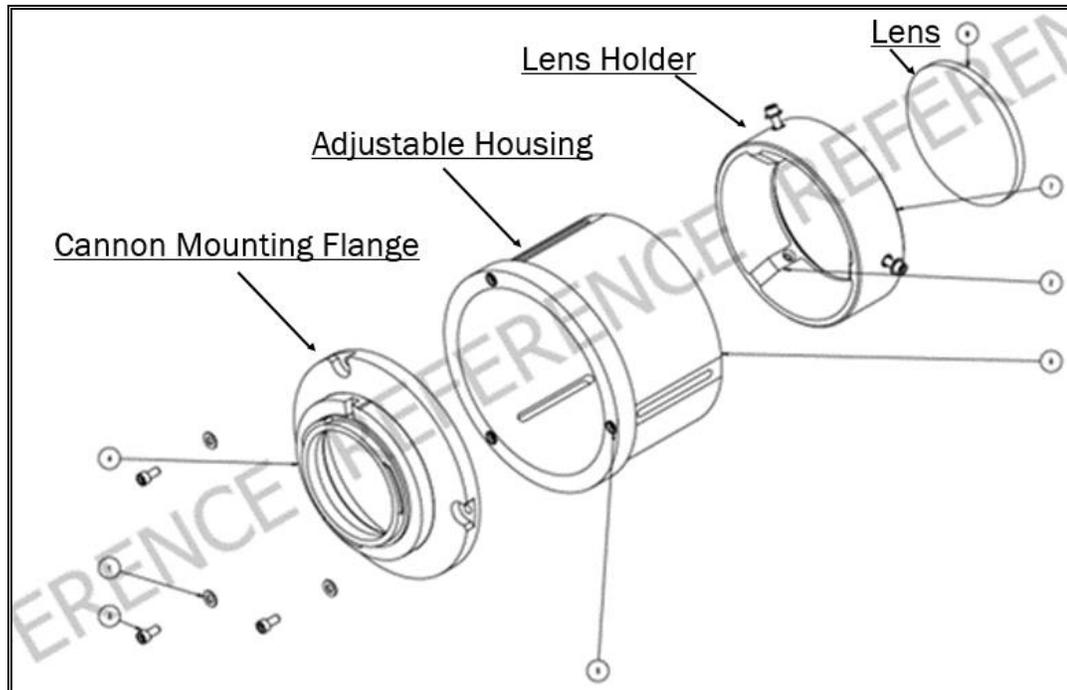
Shows schematic of 3D printed lens housing and holder.
